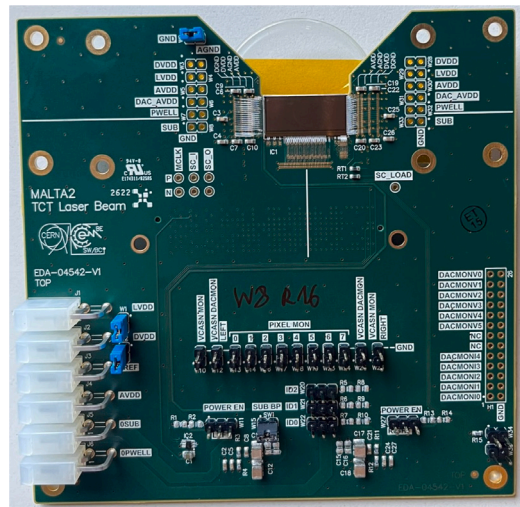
MALTA2 carrier board layout for E-TCT with a wide opening at the top.
